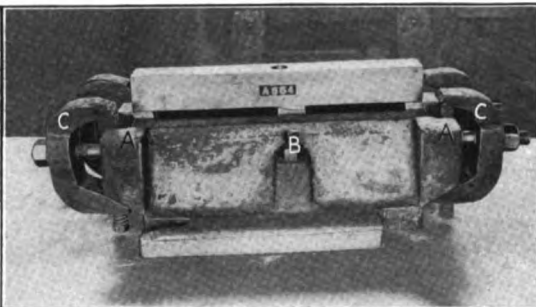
MILLING FIXTURE FOR SIDE BLOCKS
